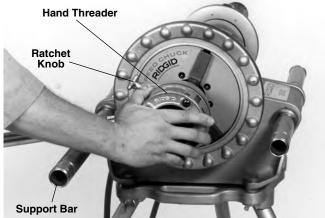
Pushing Hand Threader onto Pipe to Engage Dies
